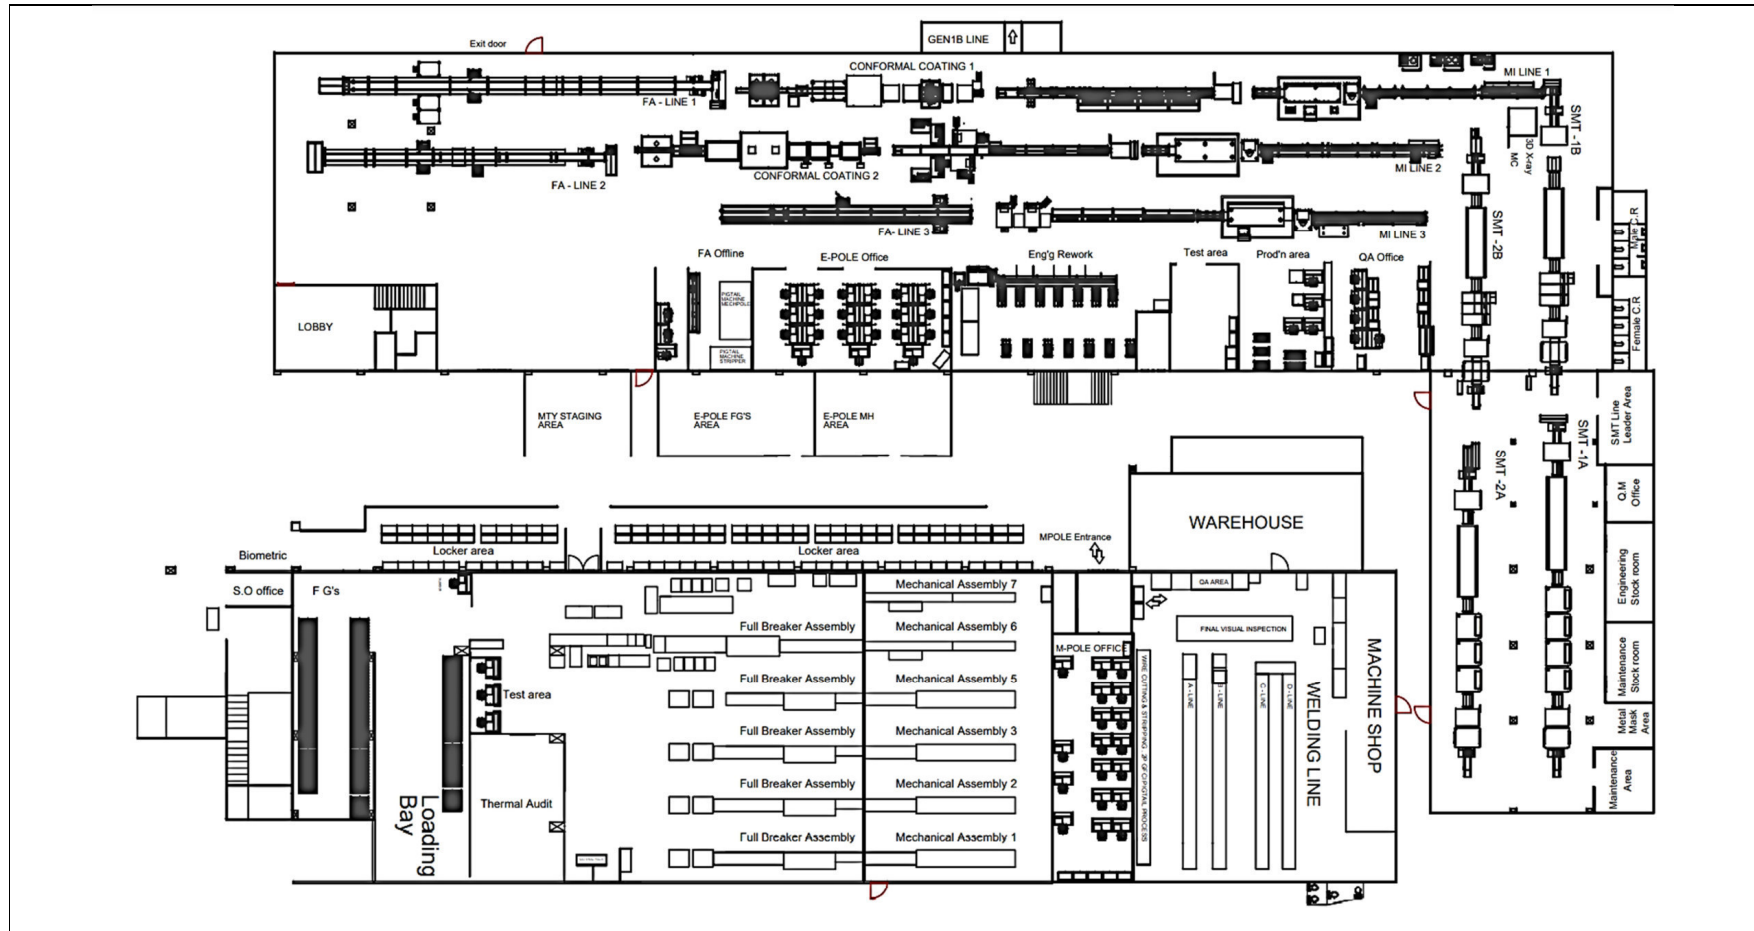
Plant Layout of the EVSE manufacturing plant in Plant 2
